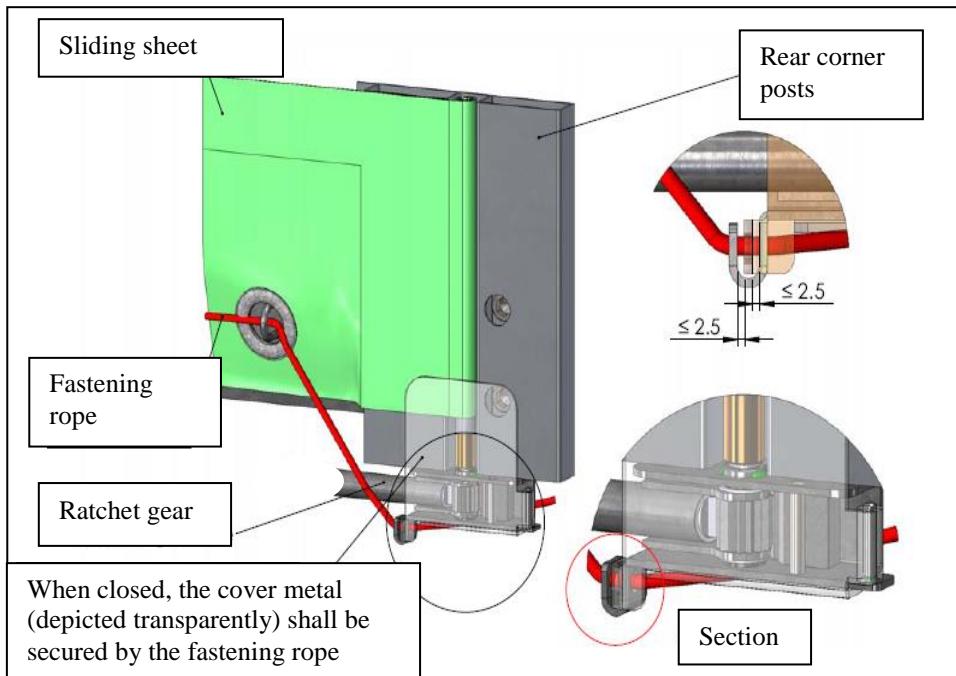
EXAMPLE OF A CONSTRUCTION OF A VEHICLE WITH SLIDING SHEETS
